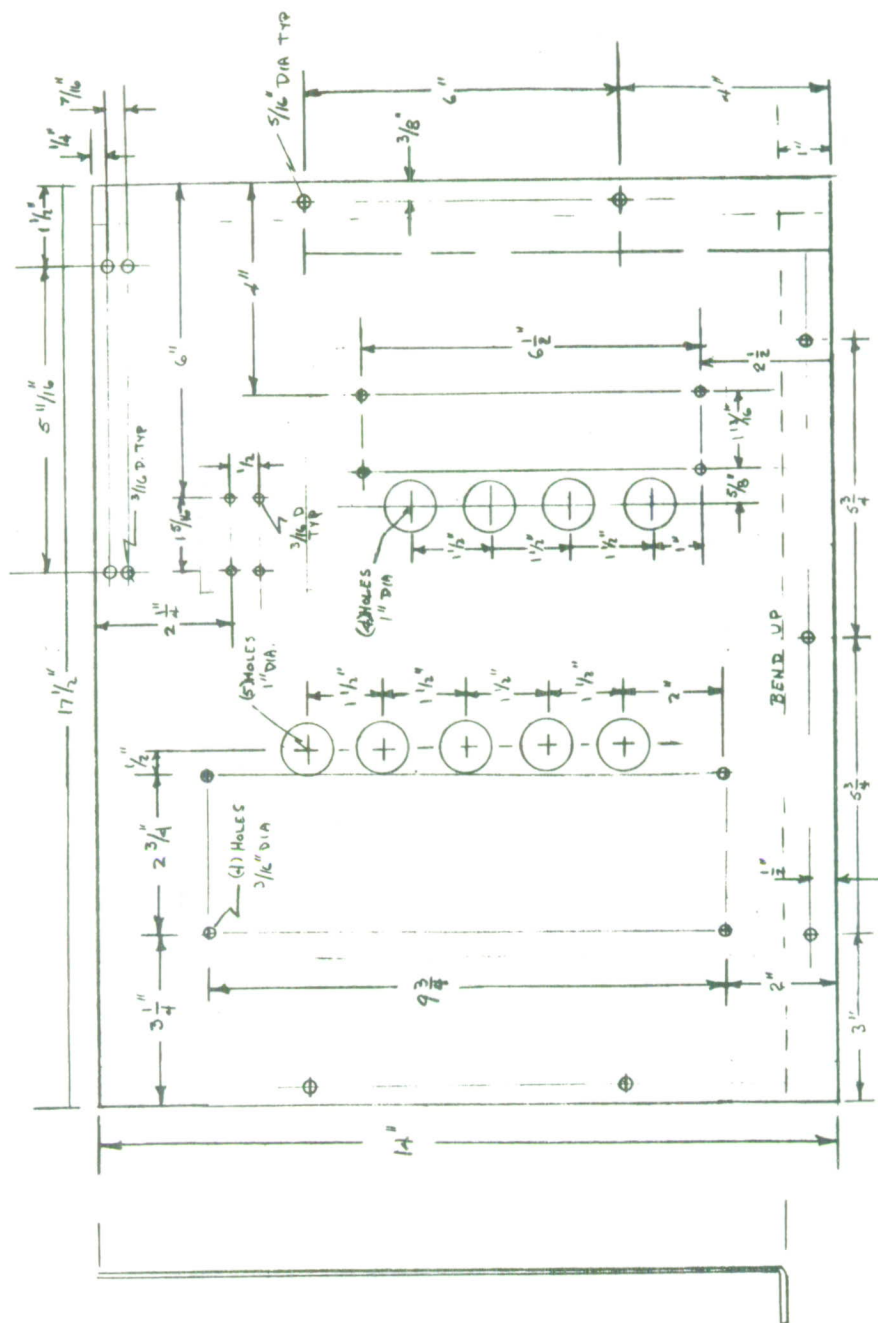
Power Supply Control & Status Hole Cutouts. Use Standard 5-1/4" 19" 1/8" Unpainted Aluminum Panel (Sheet 1 of 2).
